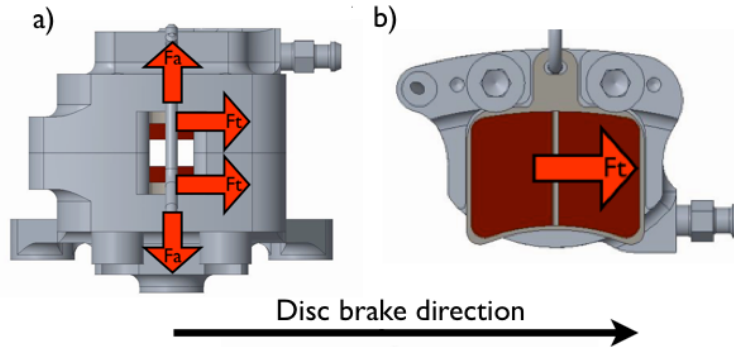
a) Axial and tangential forces in the brake caliper. b) Tangential forces in the brake caliper.
